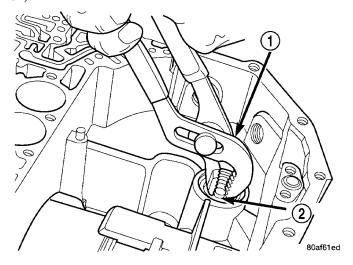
Remove Low/Reverse Accumulator Plug (Cover)
